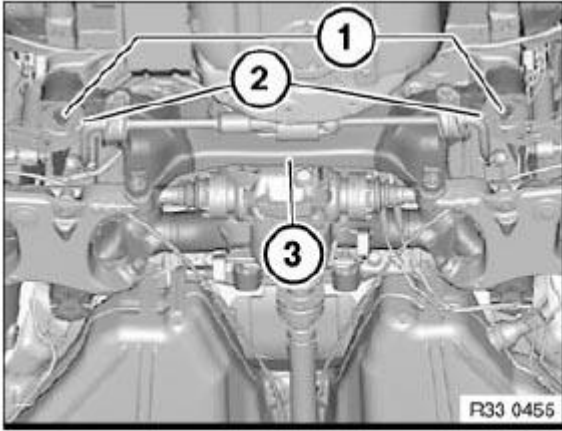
Identifying Rear Axle Carrier And Stop Plate
